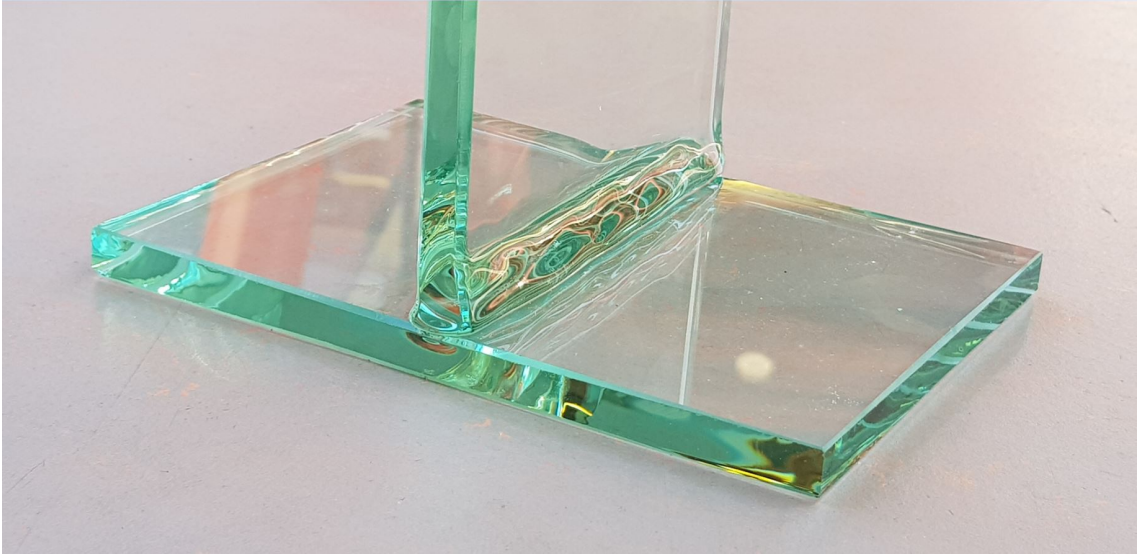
Product of the second weld experiment, close-up of the joint.
